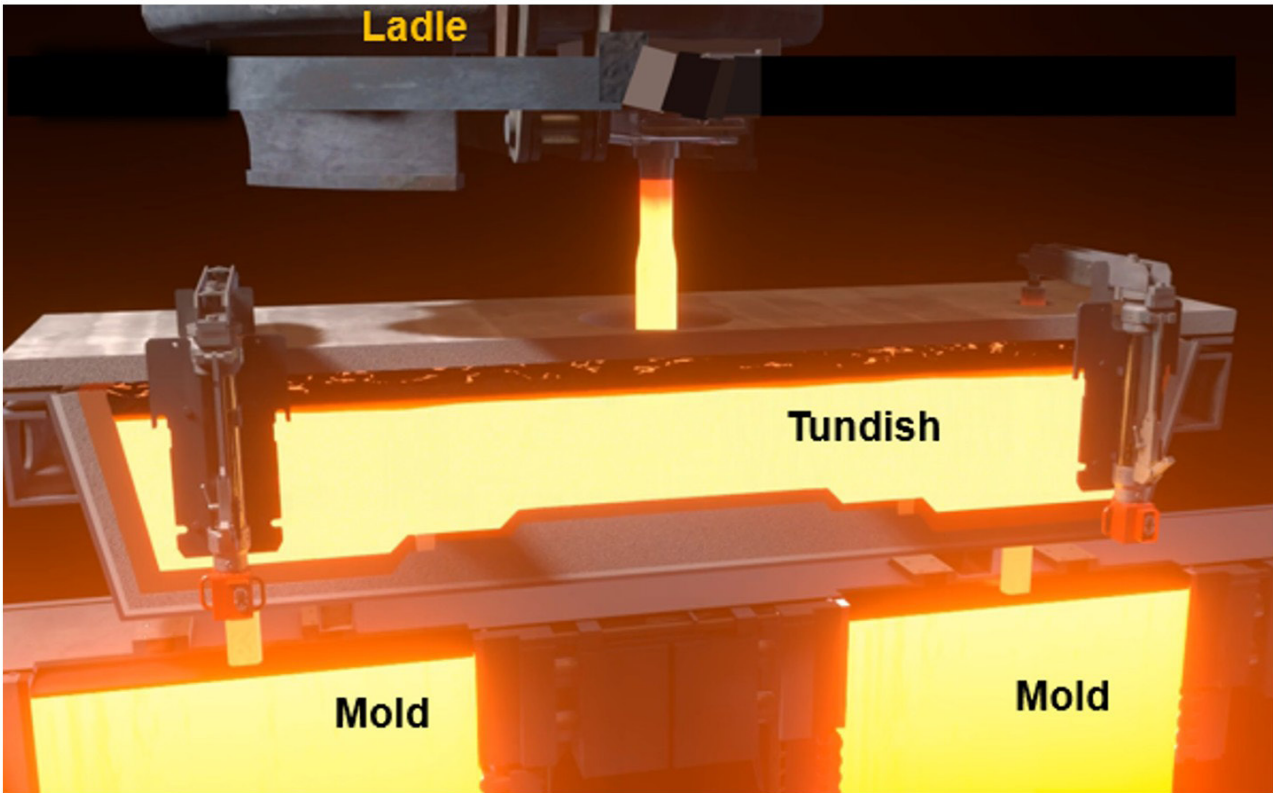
Schematic drawing of the tundish in a continuous casting machine [1].
